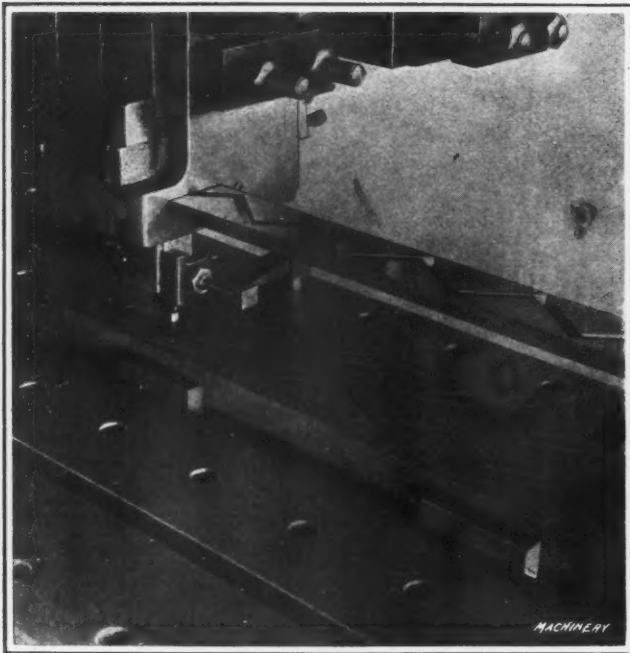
Hanson-Whitney Oil-grooving Attachment for Planers, cutting Oil-grooves in a Flat Slide Bearing
